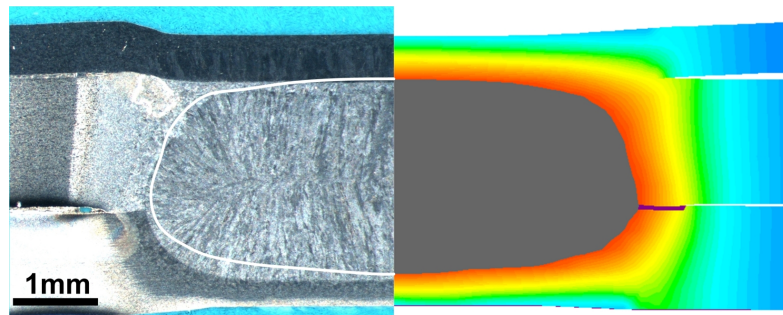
Experimental and numerically calculated Cross-sectional views of centre-point welds in weld series 1, 2 and 3
